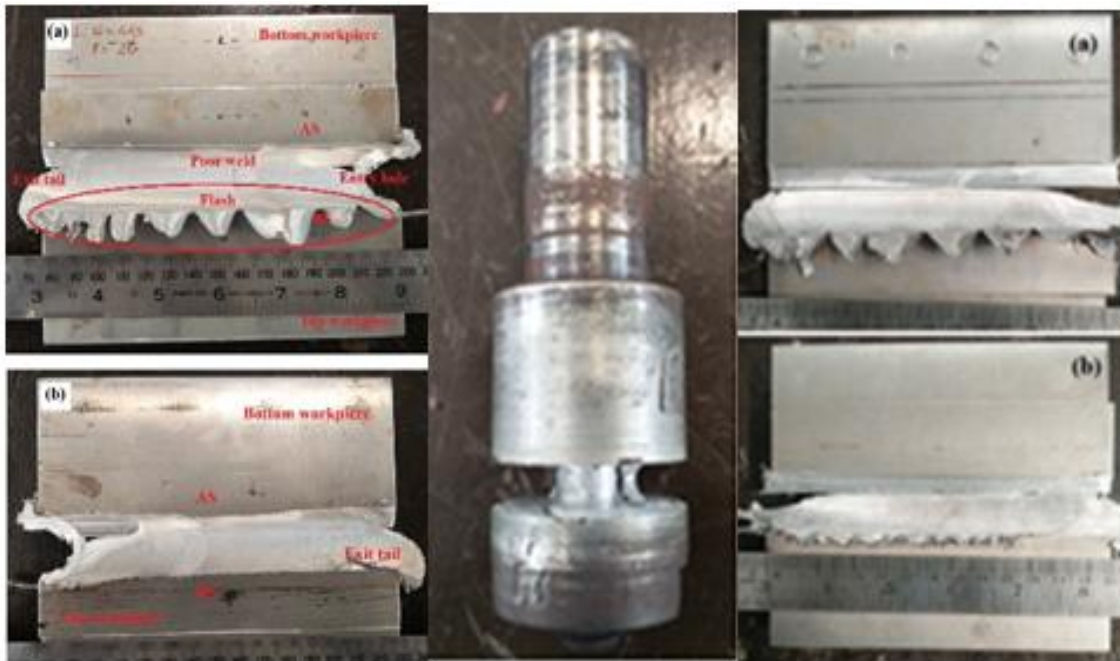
(left) Weld formation in experiment-4, (a) Top surface, (b) Bottom surface; (middle) Tool view after performing experiment-4; (right) Weld formation in experiment-5, (a) Top surface, (b) Bottom surface
